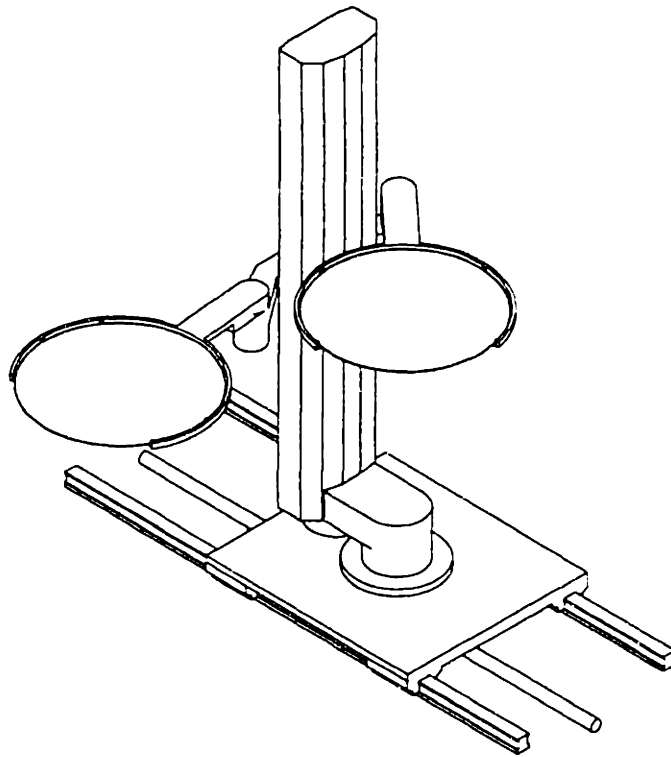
Wafer handler concept with dual output revolute joints and a fixed mast.
